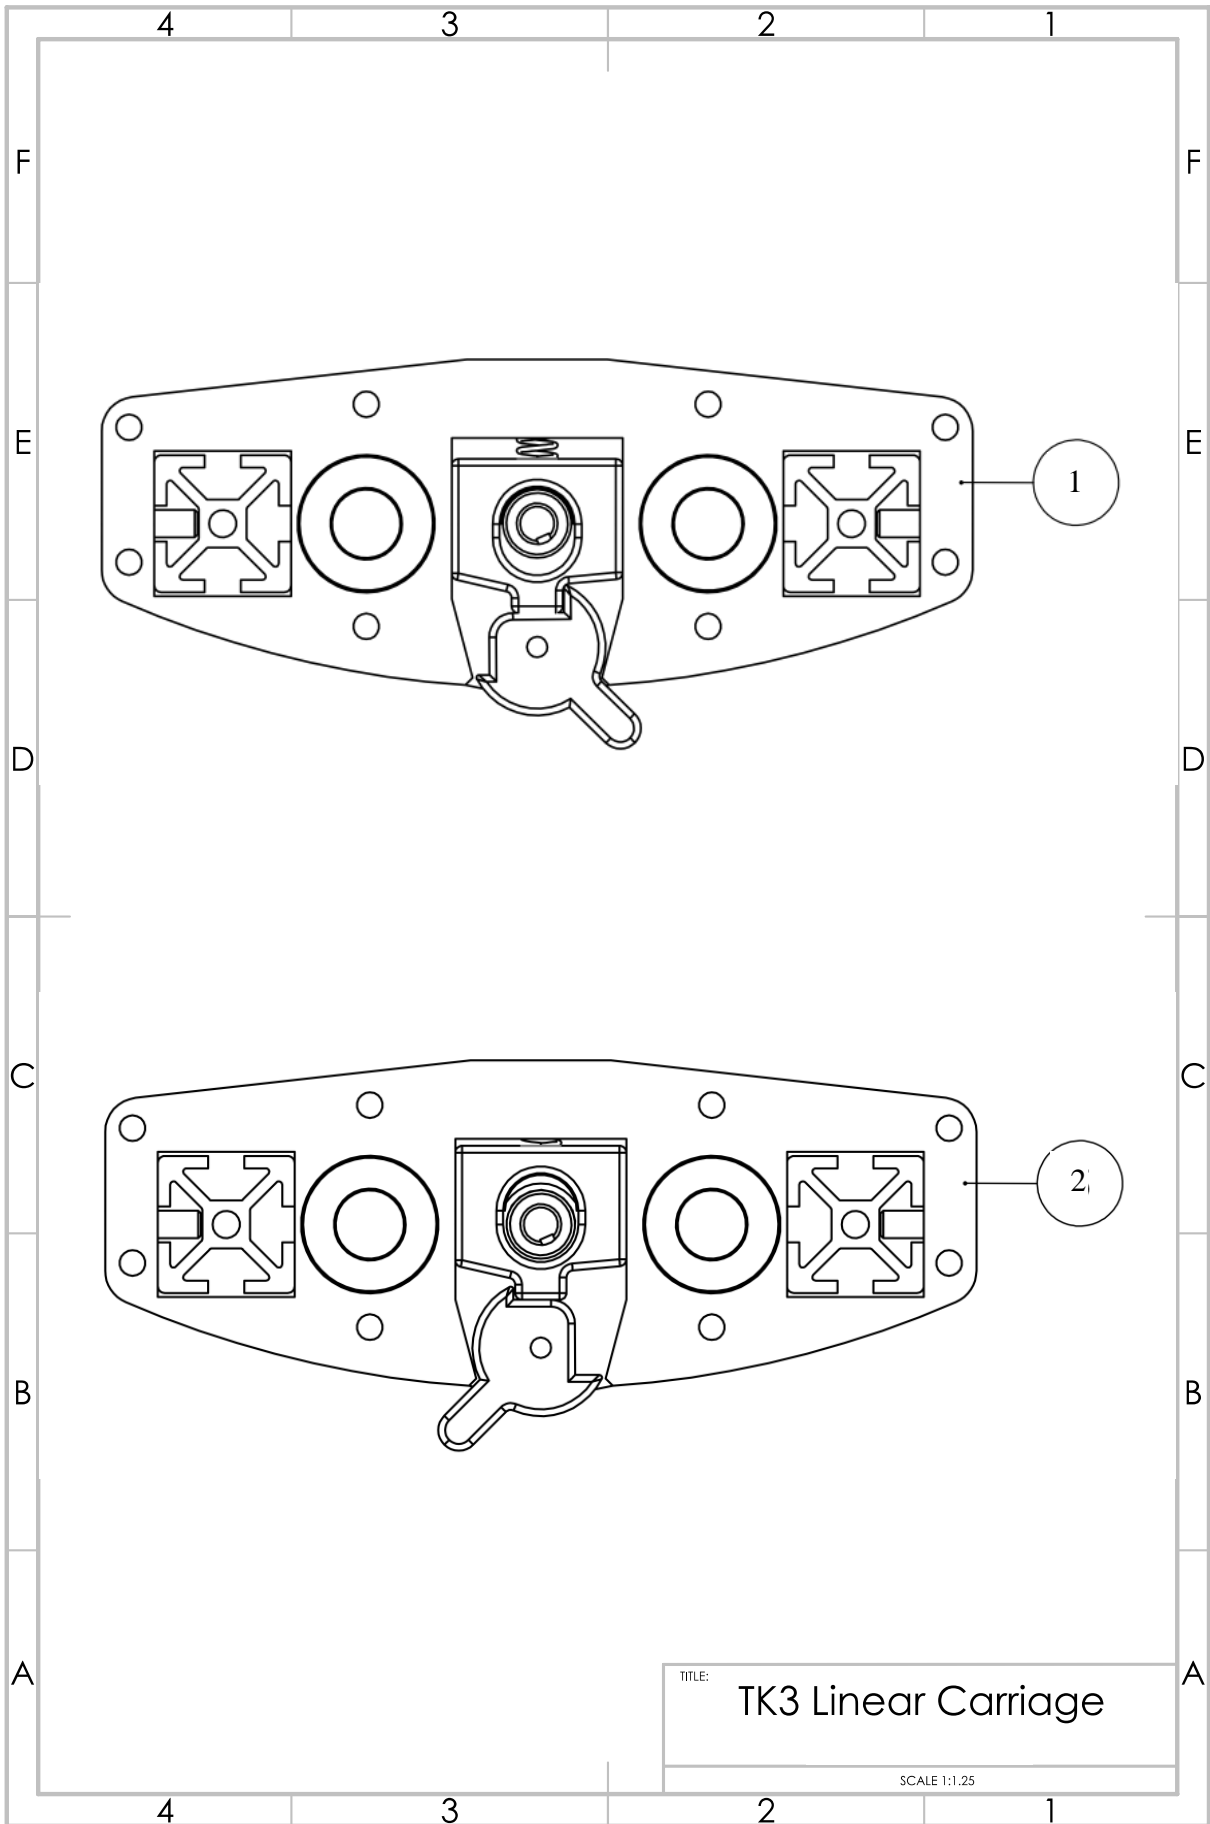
Exploded View Technical Drawing of Linear Carriage:
